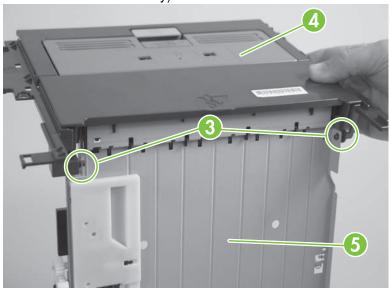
Remove the rear cover, rear door, and duplex-paper-feed assembly (5 of 6; HP LaserJet P2050 Series)
